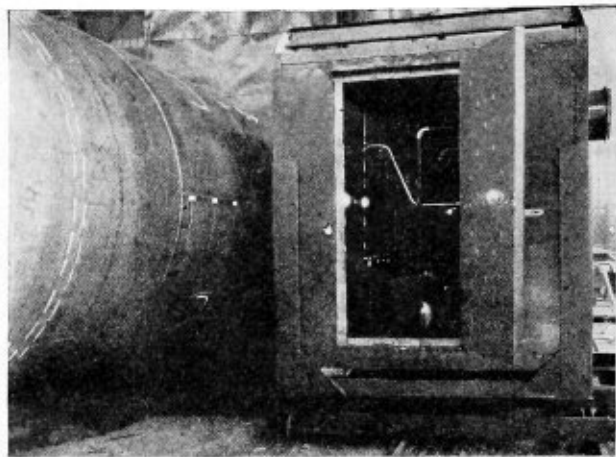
(Above) X-ray equipment for testing vessels. Fig. 5.—(Below) Furnace for stress-relieving welded vessels
